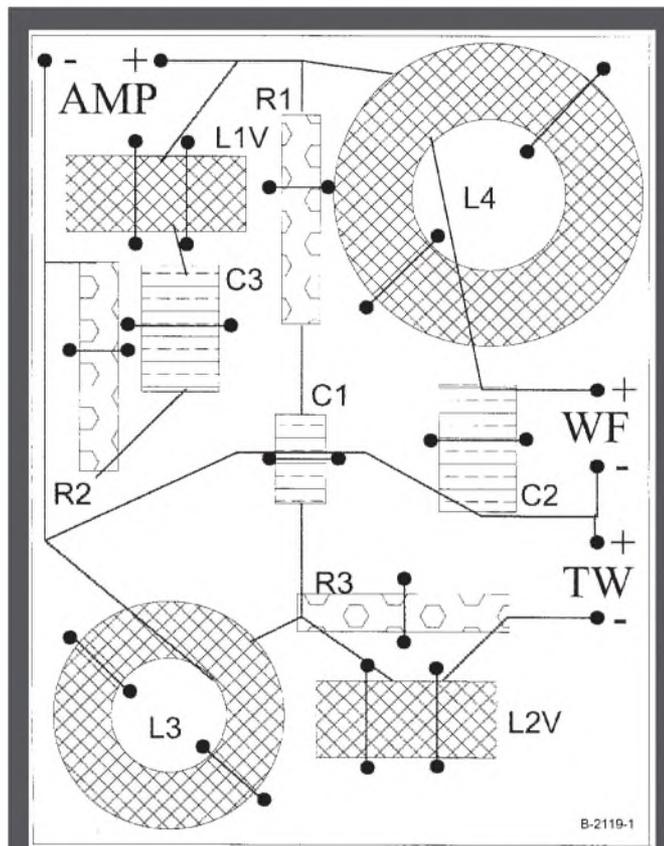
Suggested layout (from Adire Audio assembly instructions).
